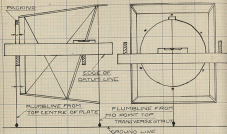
CHECKS ON BEARER FOR RADIAL ENGINE.
